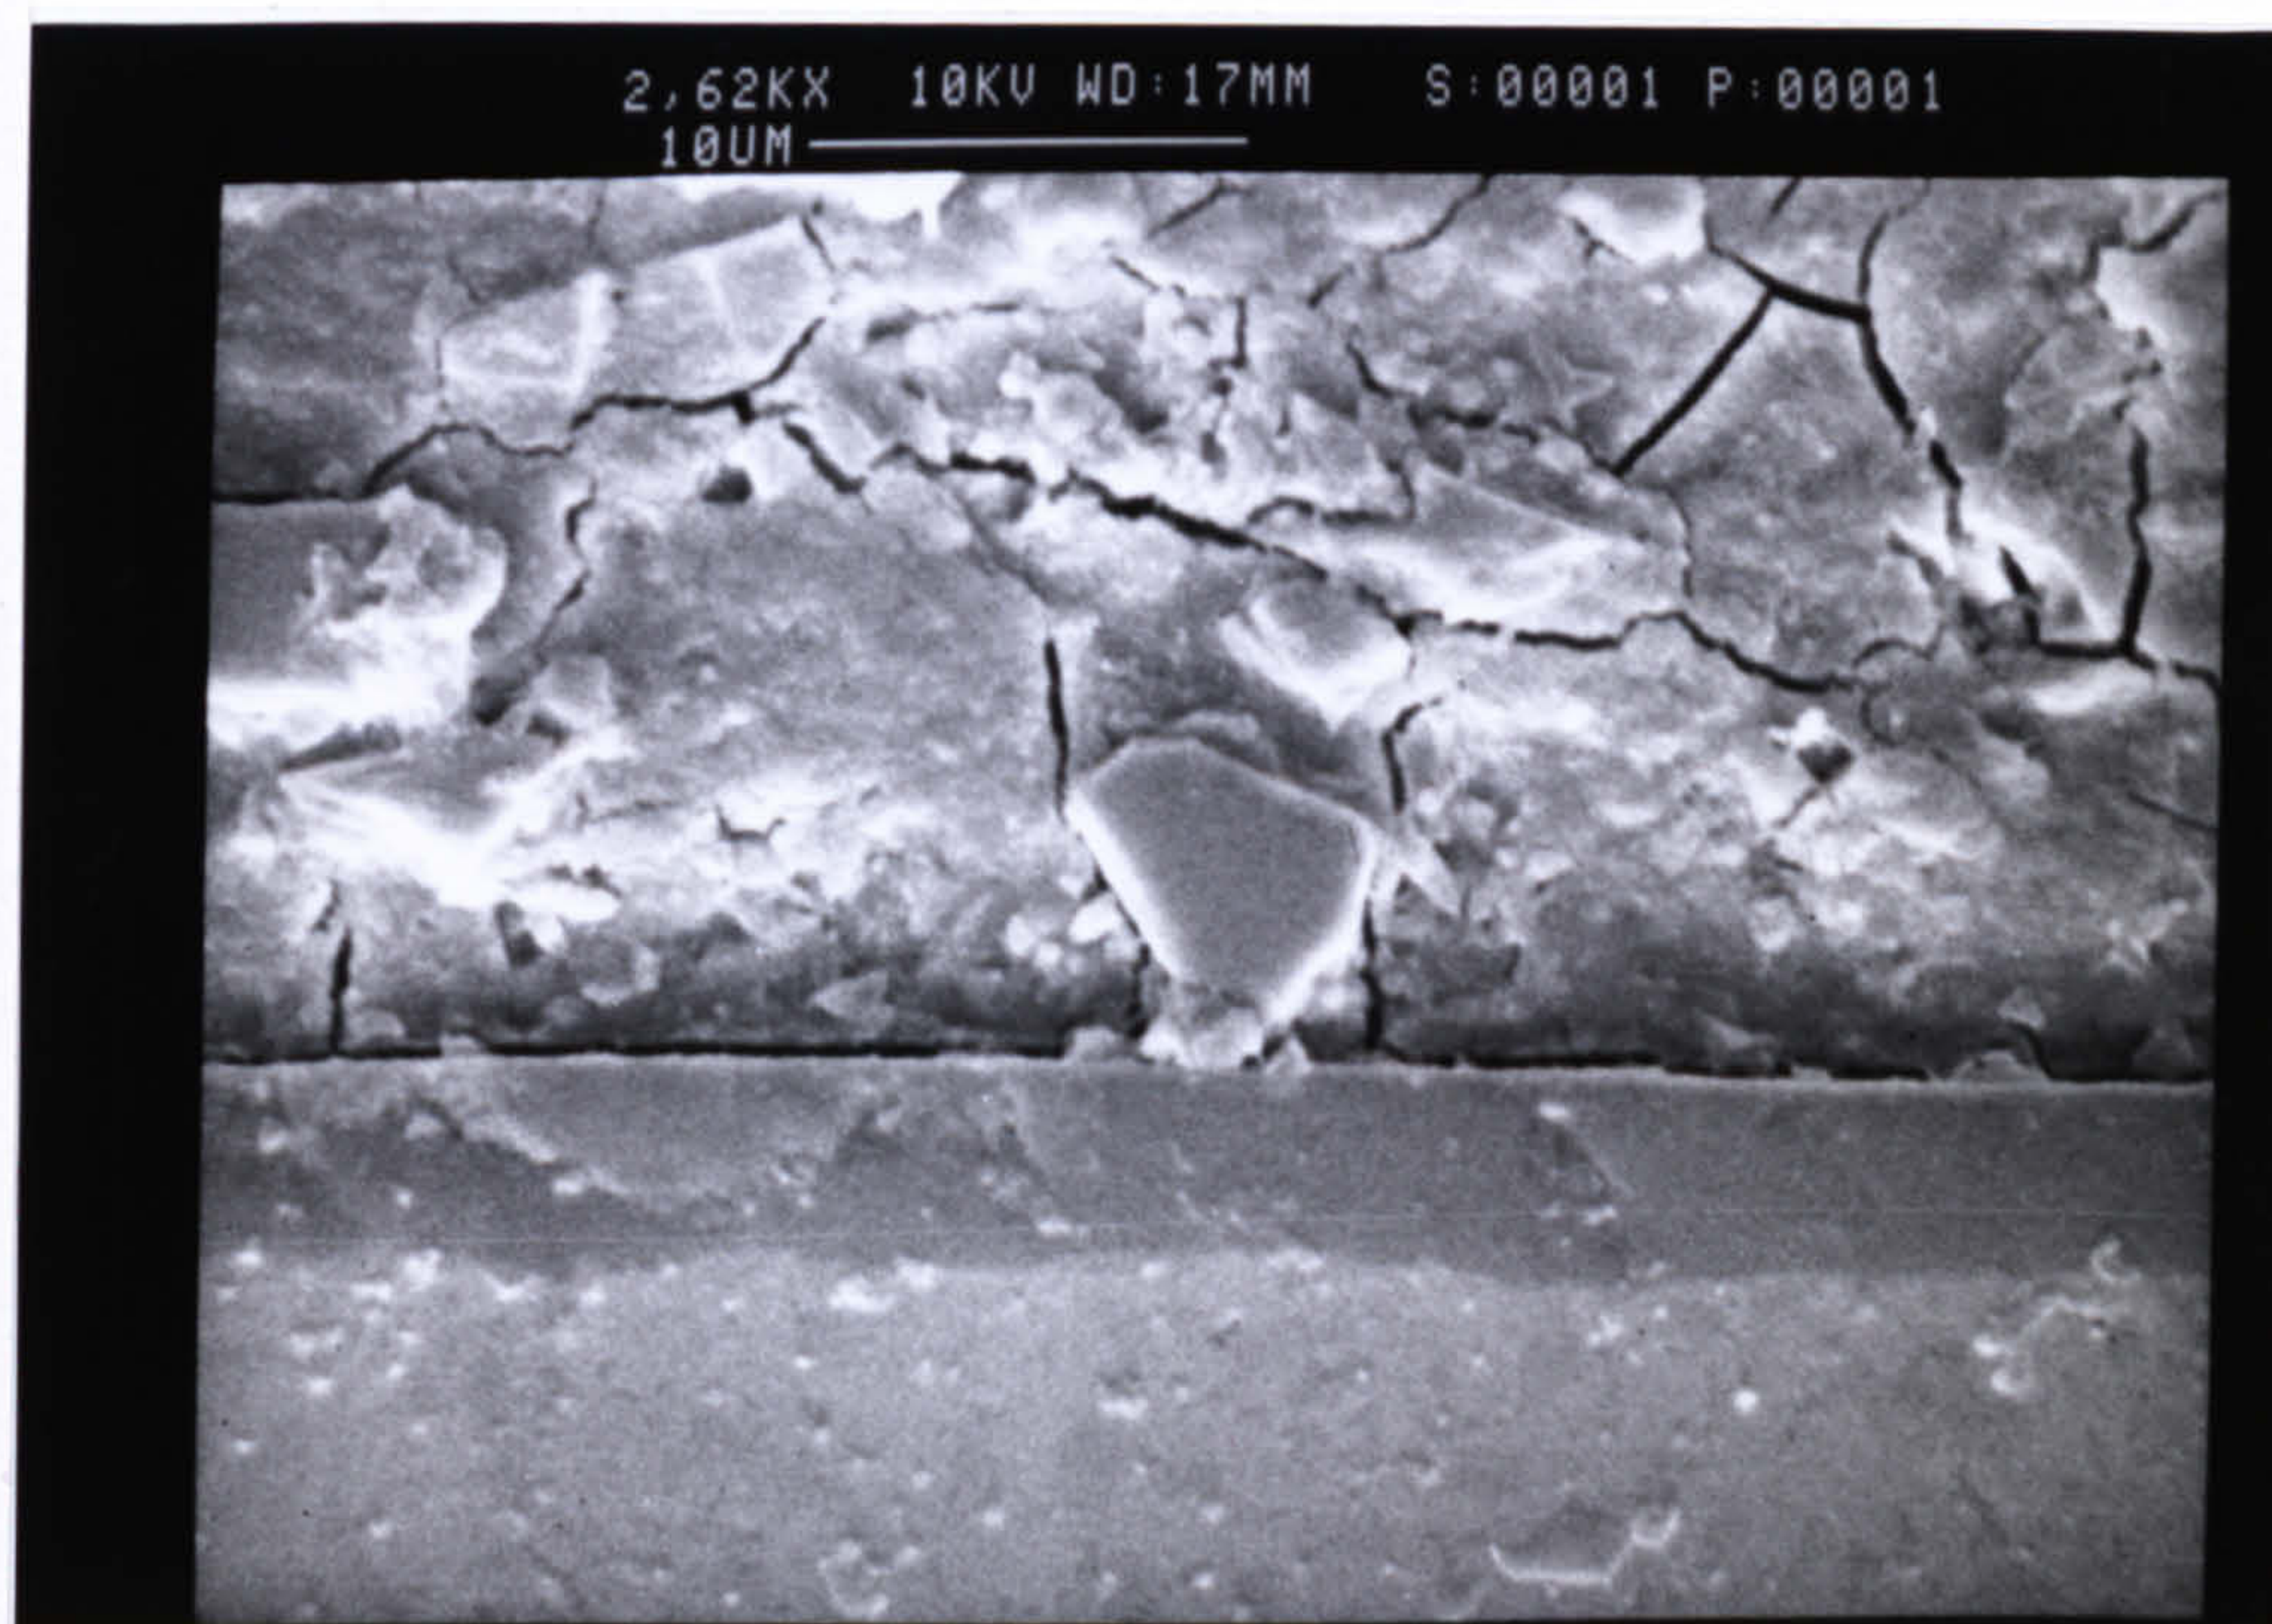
Smooth Flank Surface With Scratches On The Flank Face Of KC910
